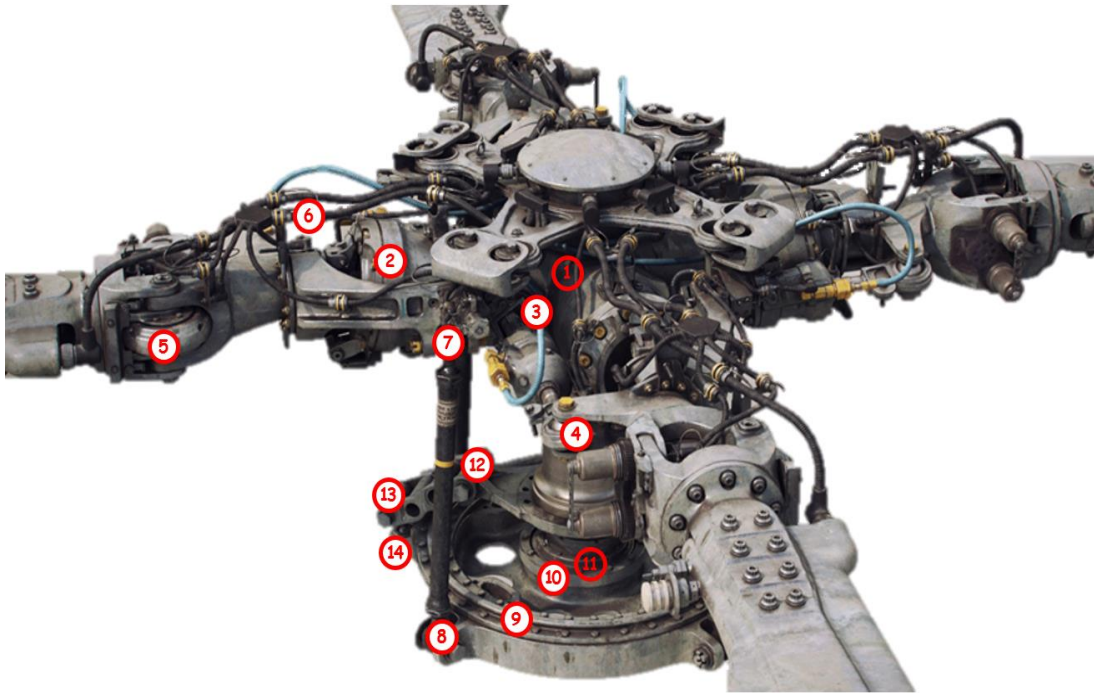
Joints of UH-60 Main Rotor Dynamic Model [50]
